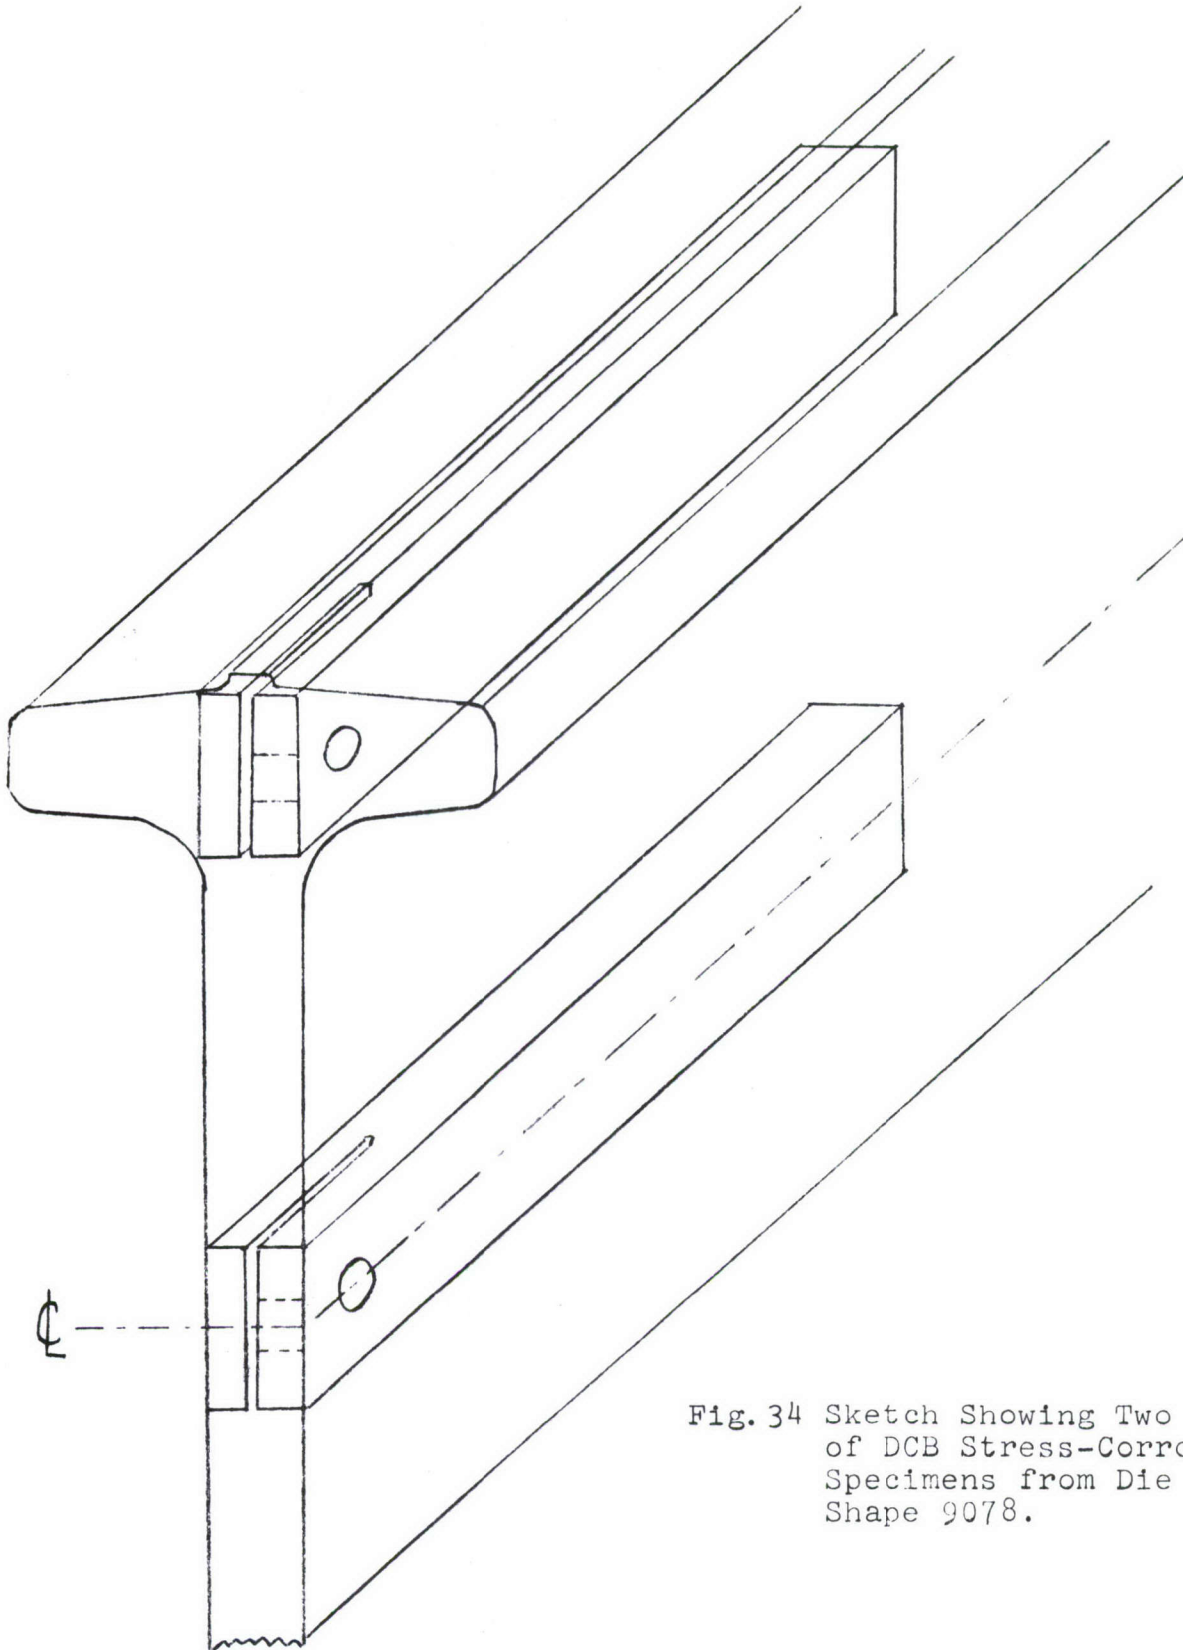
Sketch Showing Two Locations of DCB Stress-Corrosion Specimens from Die Forged Shape 9078.
